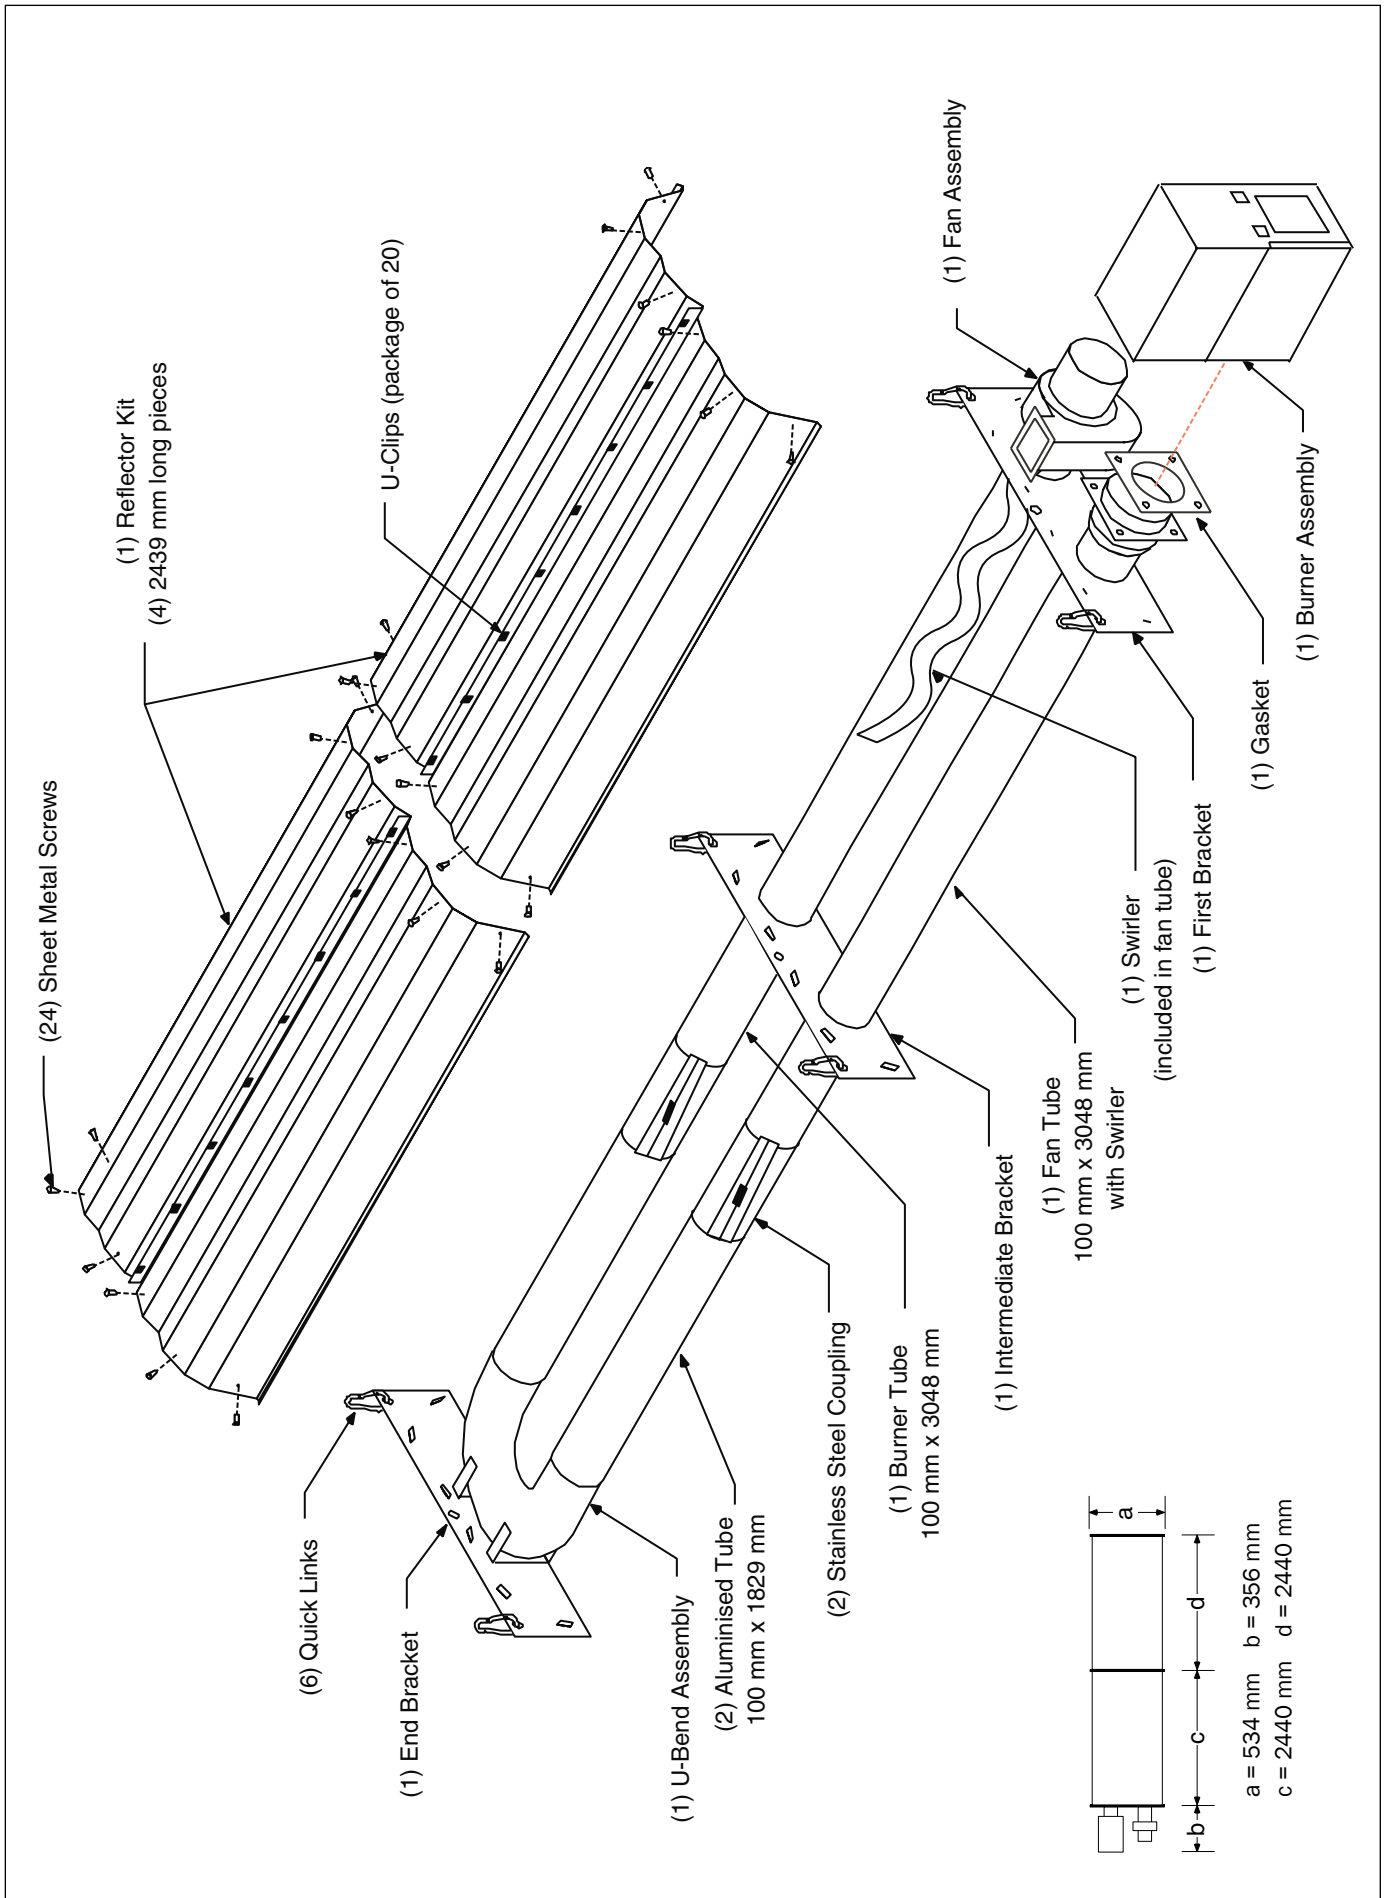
Model BH20UT/BH25UT U-Tube Assembly
